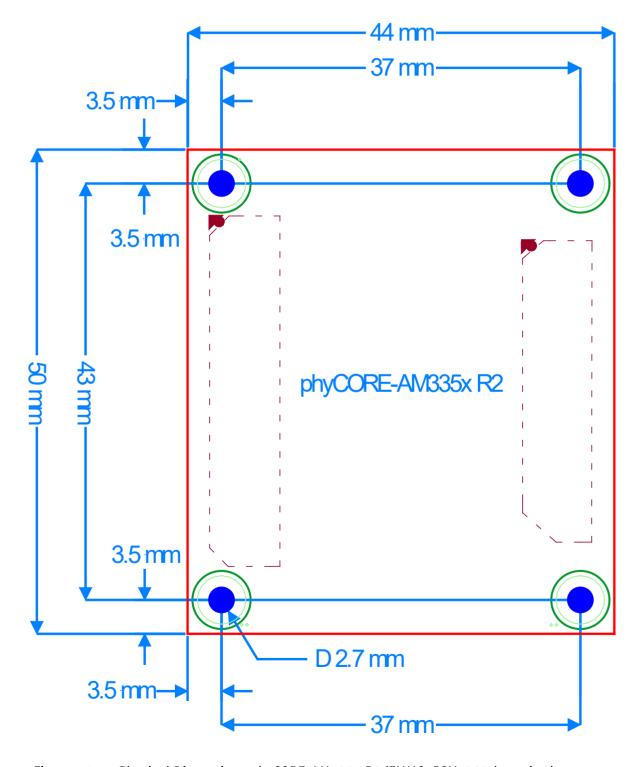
Physical Dimensions phyCORE-AM335x R2/EMMC, PCM-060 (top view)
